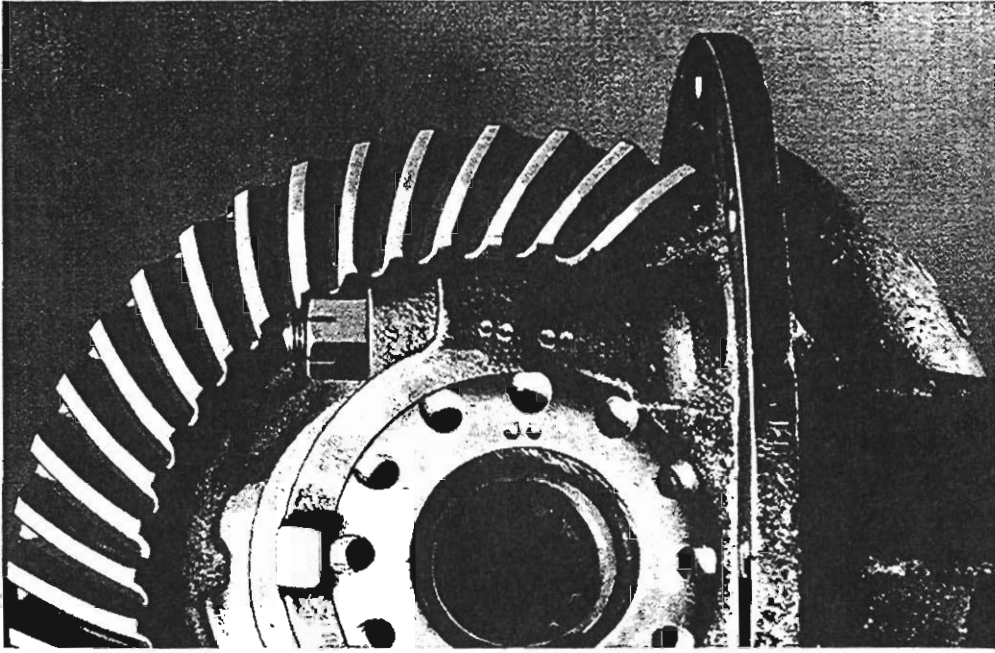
Stake Lockpin in Place by Using Center Punch To Upset Edge of Pin Hole
